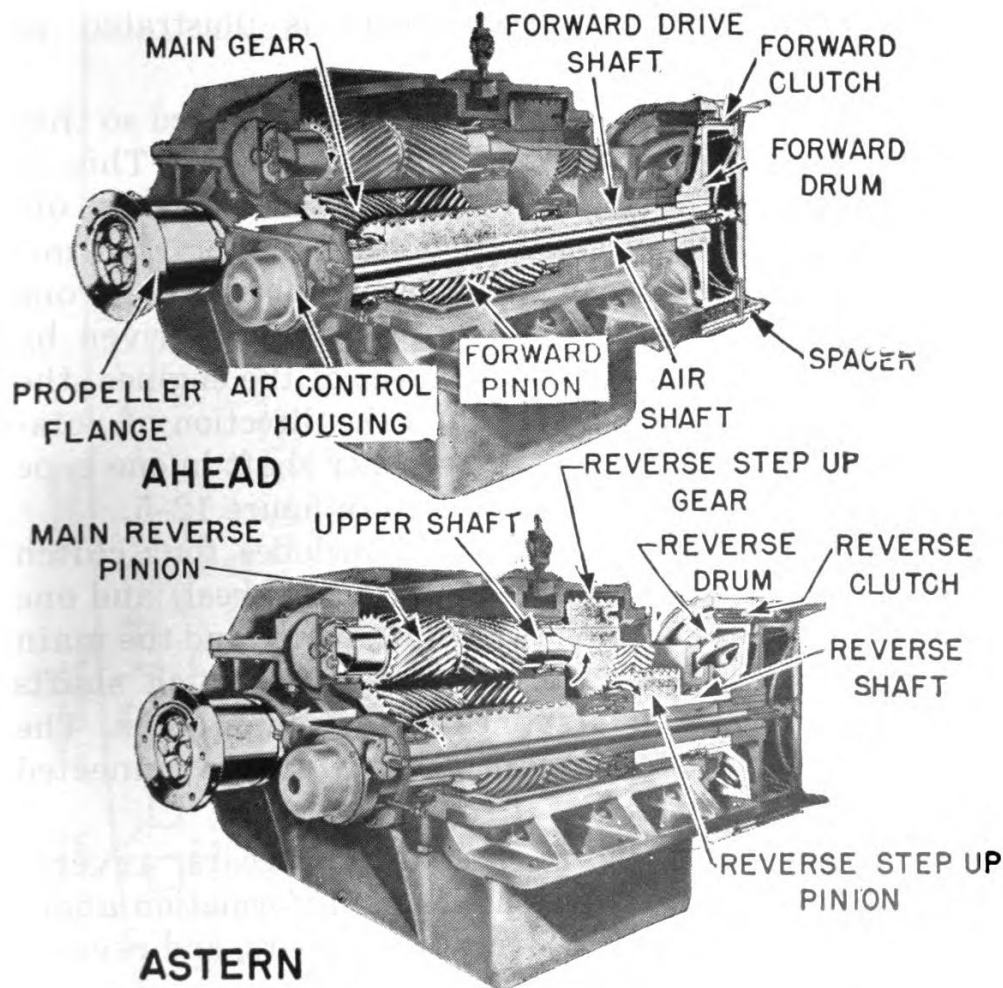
Clutch and reverse-reduction gear assembly.
